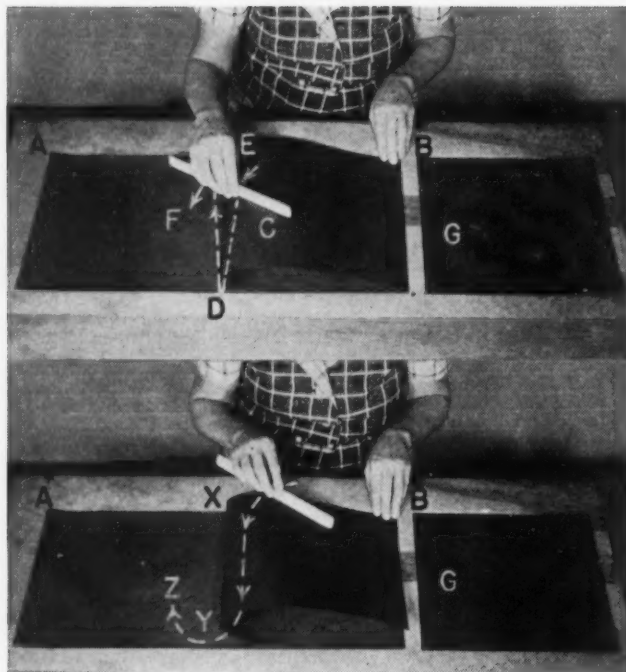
PATH OF THE HAND IN CREASING A FOLDED SHEET OF PAPER
